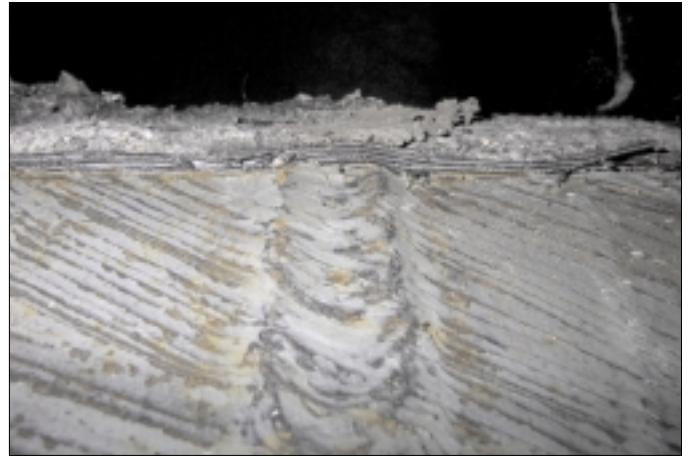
Close-up view of weld bead. Rust originates from outdoor storage of pipe with partly peeled off tape wrapping
